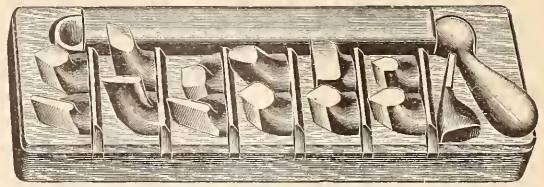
WORKING SET OF TOOLS WITH "O. K." TOOL HOLDER.
